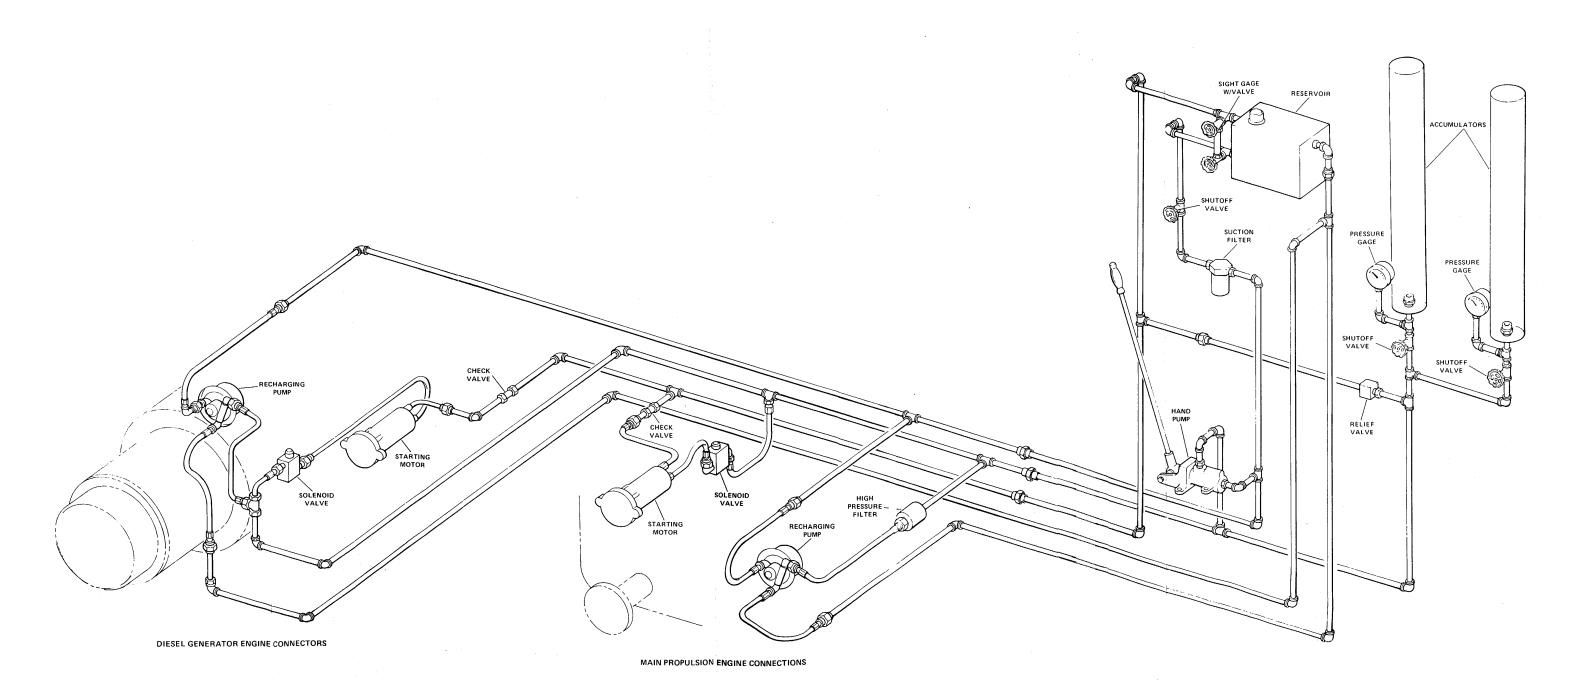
Hydraulic Starting System Shaft Engine Room.
